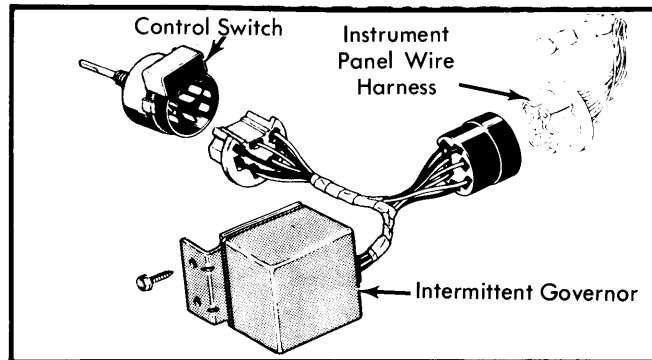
Windshield Wiper Instrument Panel Wiring Showing Intermittent Governor
